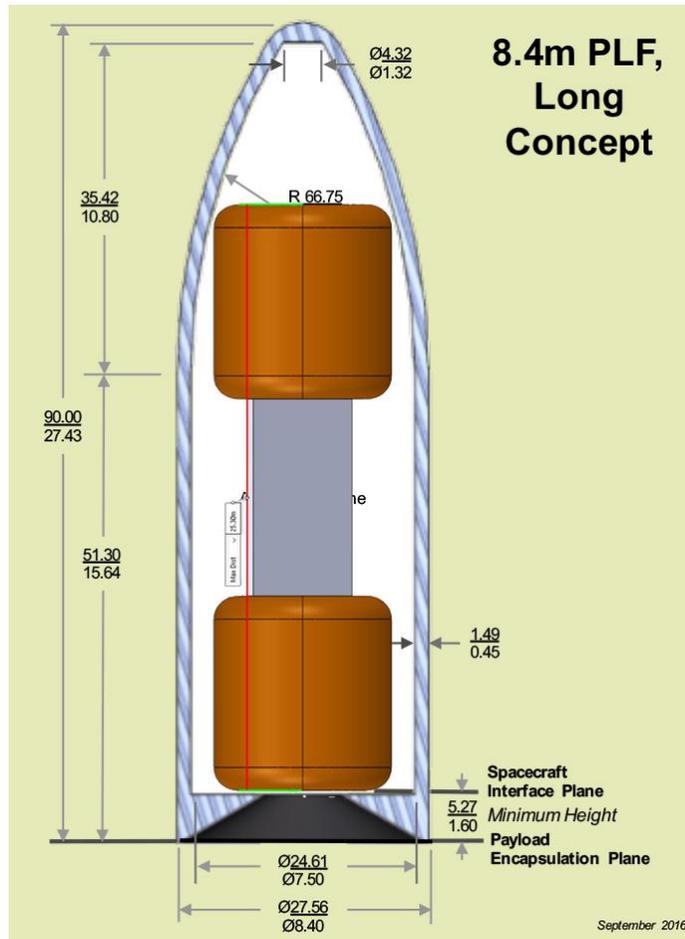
Hammerhead Assembly Inside SLS Block 2
